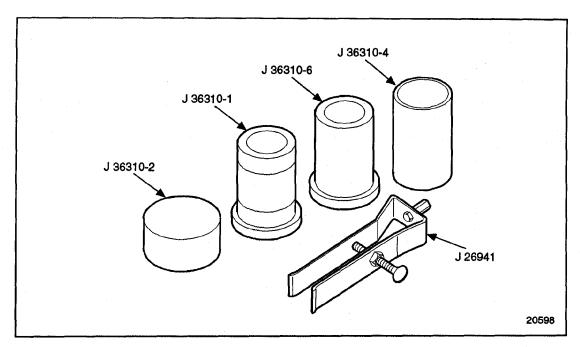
Air Compressor and Fan Drive Service Tool Set
